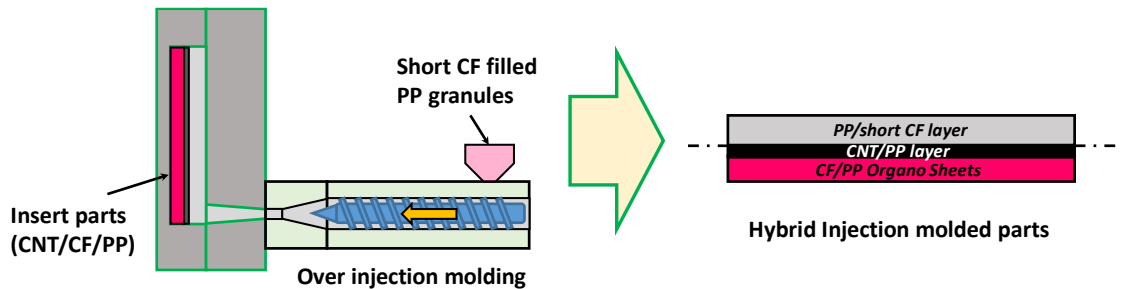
Overview of fabrication process of hybrid injection molded parts.
